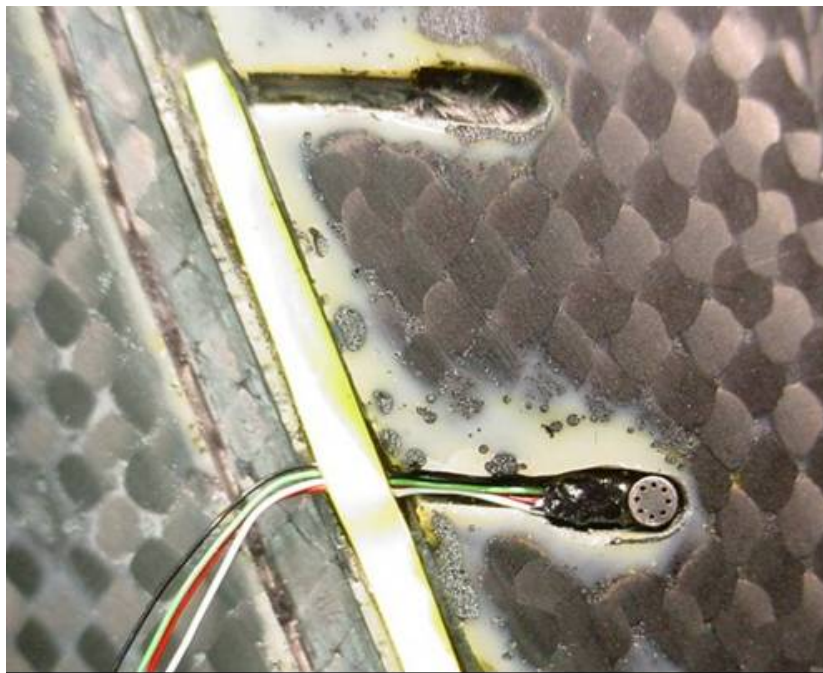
View Of The Vane Fabricated By Using A Rotary Hand Drill To Create Recesses For The Instrumentation And Wires.
